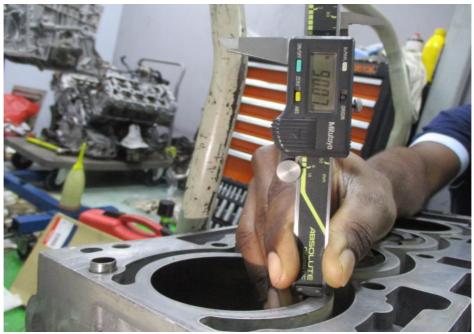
shows measurement being carried out to the bore of cylinder 4 of the BMW engine. The bore and stroke measurements of the BMW engine were carried out using a digital Vernier Caliper.
